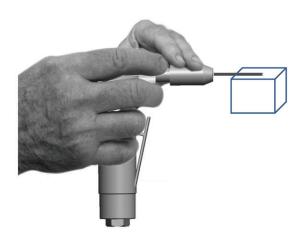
Operator working position - Angle polishing/filing machine with reciprocating action - Example designed for single hand-held operation
